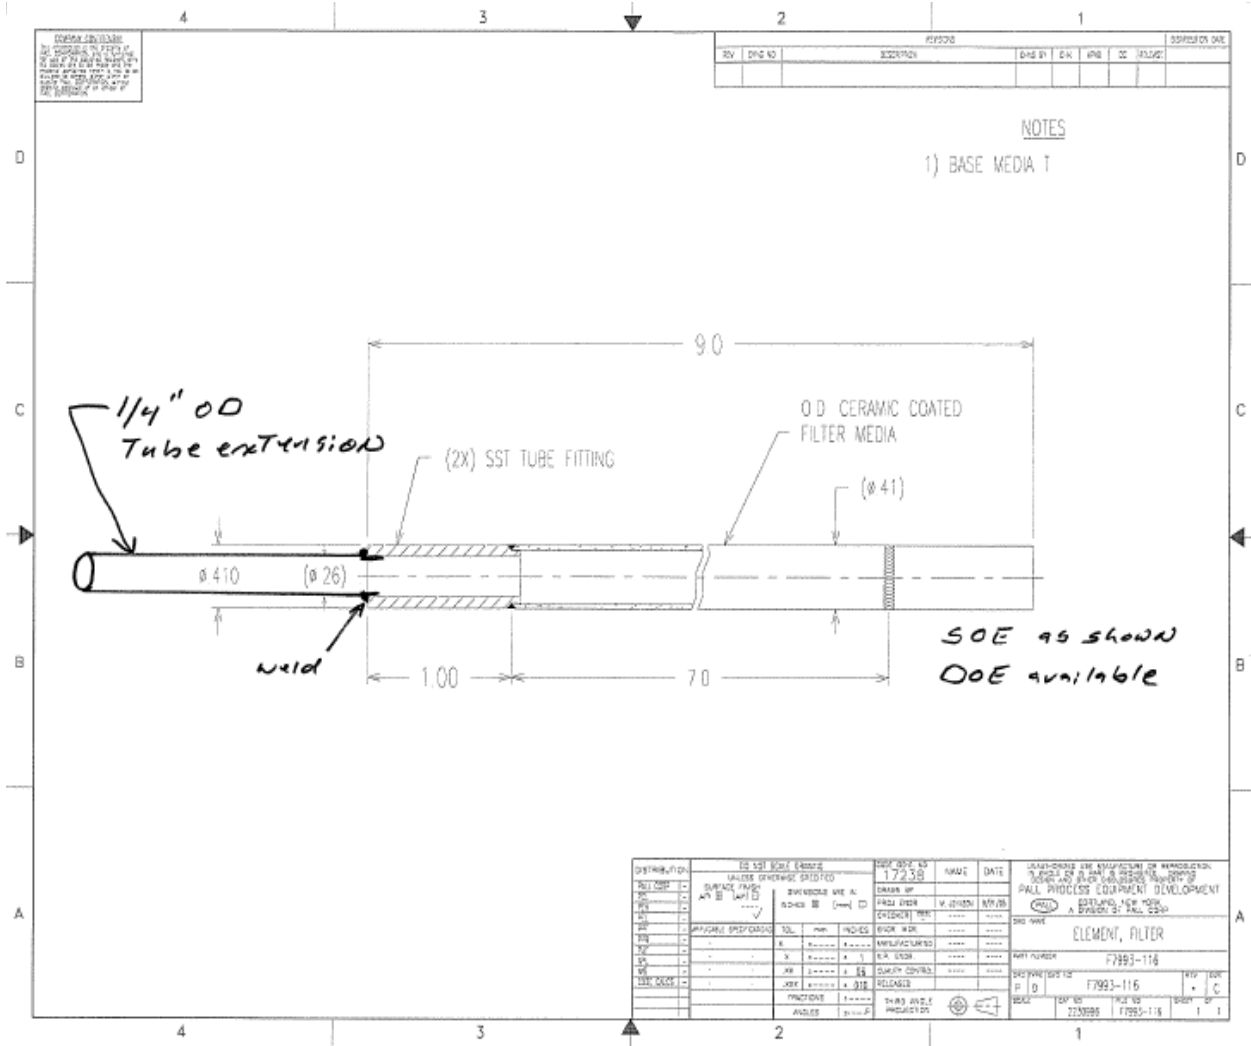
Composite porous ceramic/stainless steel substrate tube with welded ends.
